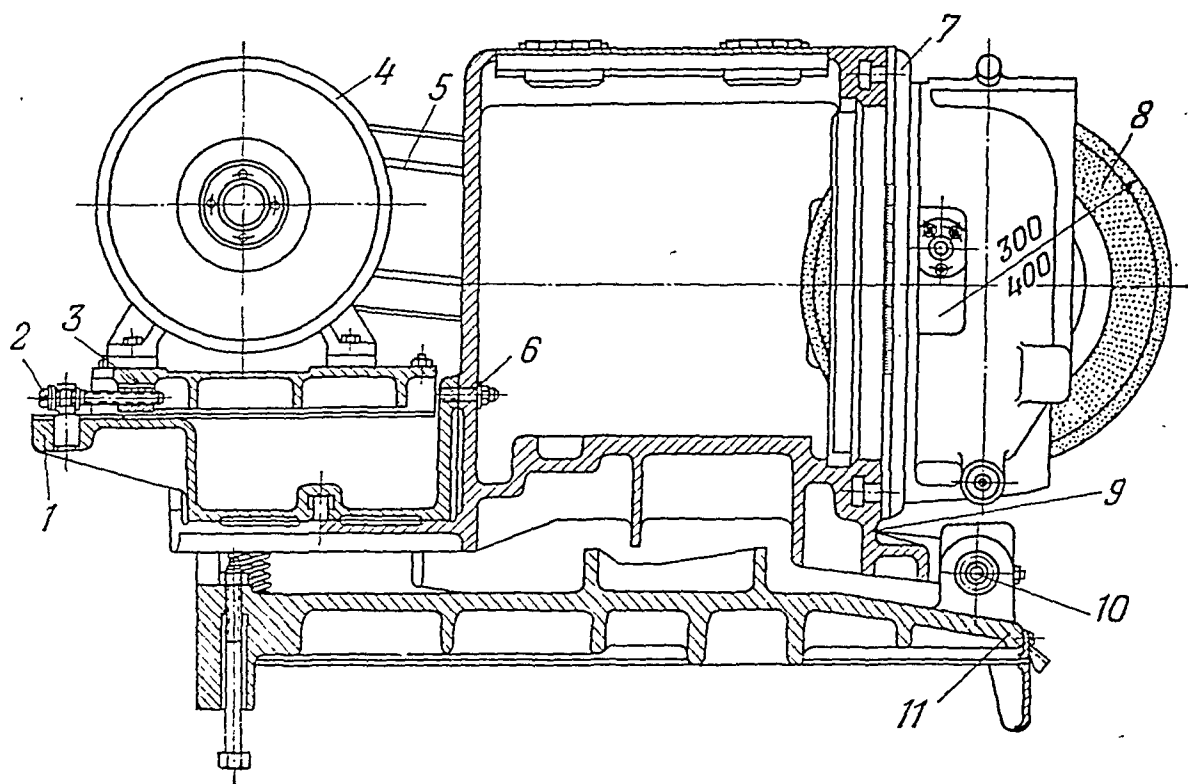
Wheelhead of the thread grinder, model 5B82:
